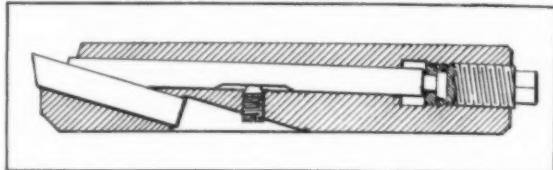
Toolholder in which the cutter is supported at its heel and held by a wedge.
